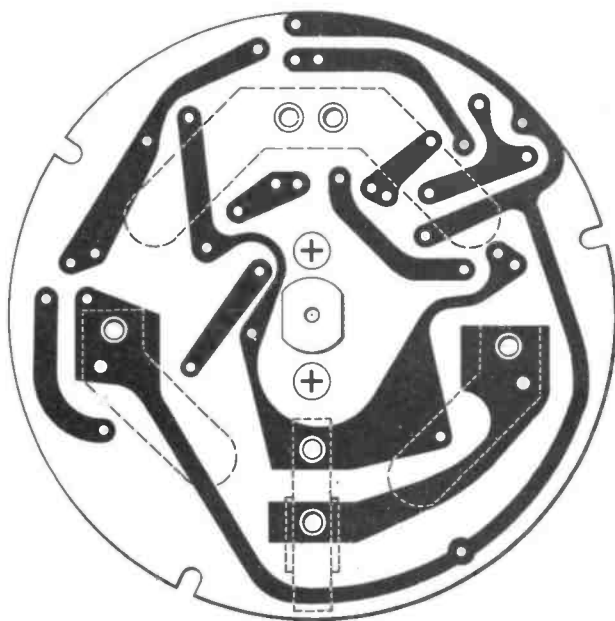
Printed circuit board for Snap assembly model (15 minute timer). Broken lines indicate position of battery contacts which are secured to the board by eyelet fasteners.
